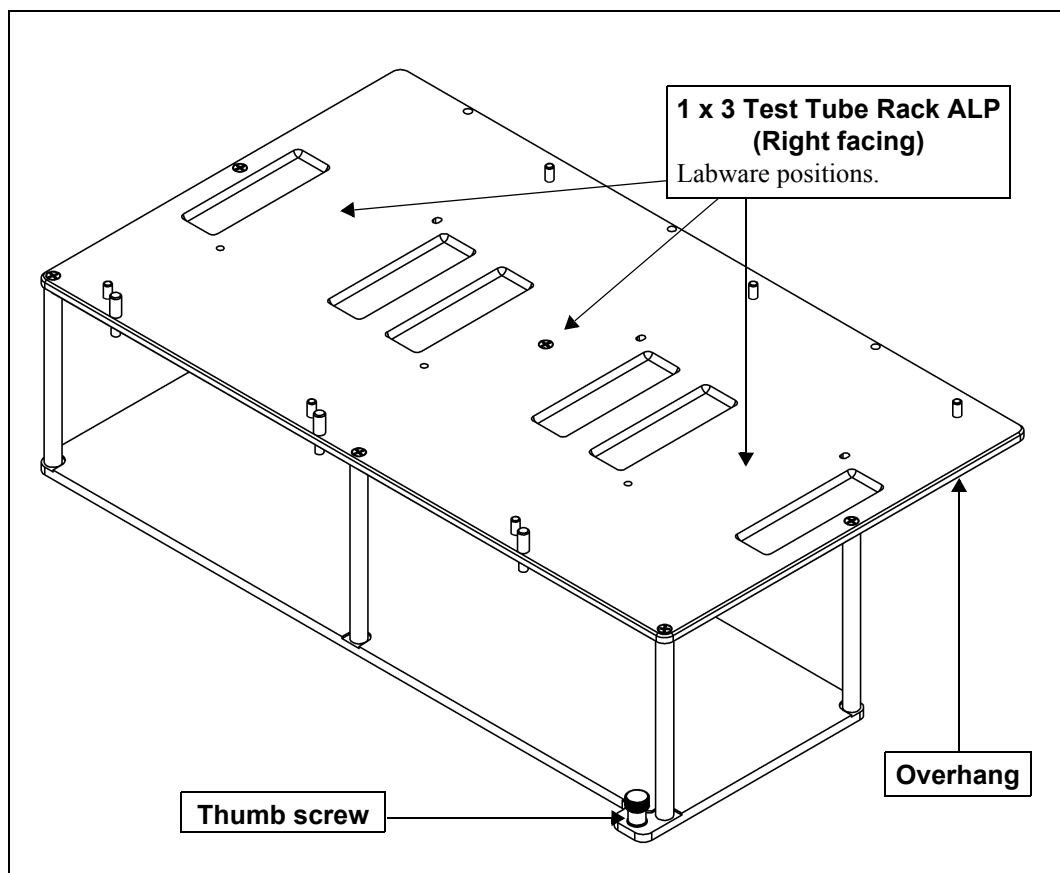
1 x 3 Test Tube Rack ALP (right facing)
